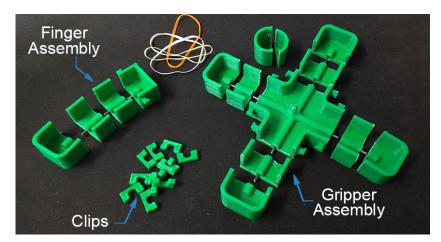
Reconfigurable mold for soft robot fabrication. Parts can be composed to make a soft robot finger or entire gripper. Additional pieces can be used to modify the length. Air chamber configuration is configurable by clip placement. Customized design of the gripper will lead to variations in performance (see Zhang, Jackson, Mentzer, & Kramer, 2017).
